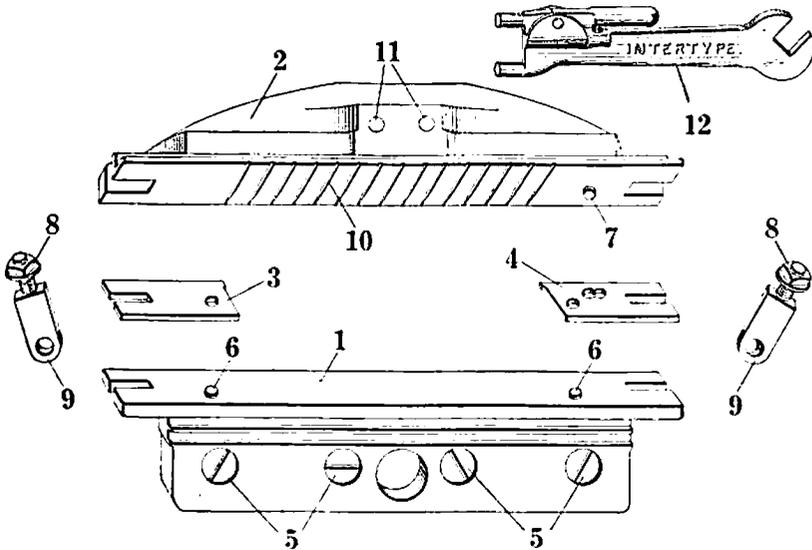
An Intertype 30-Em Universal Adjustable Mold
